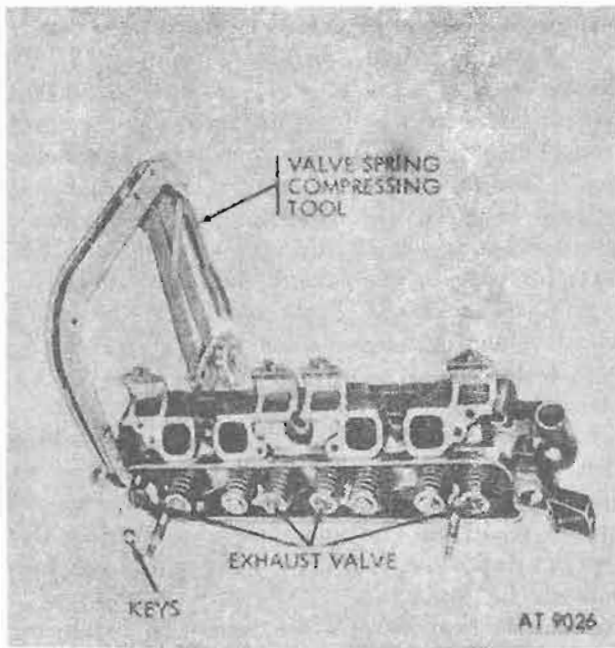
Exhaust valve spring retainer keys and valve stem cap—removal and installation.
